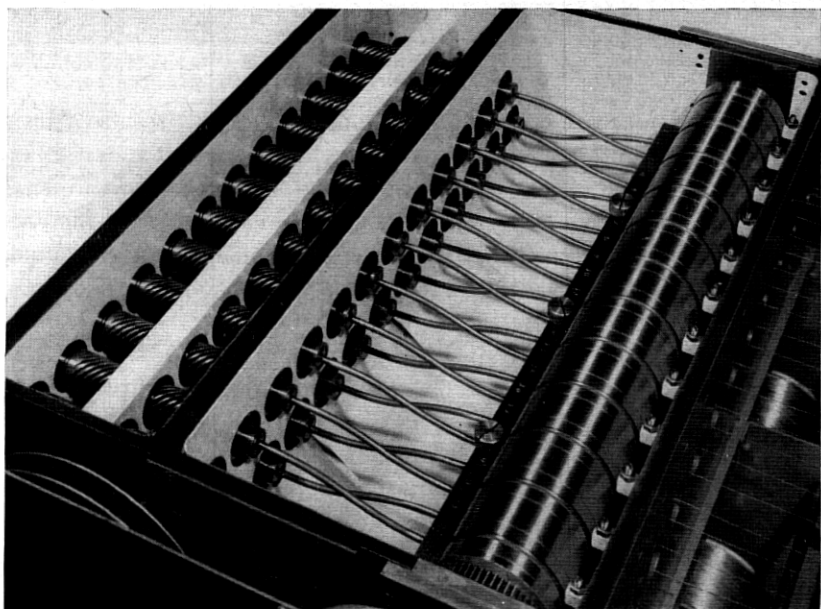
Straightening mechanism of 24 double head wire straightening machine.
